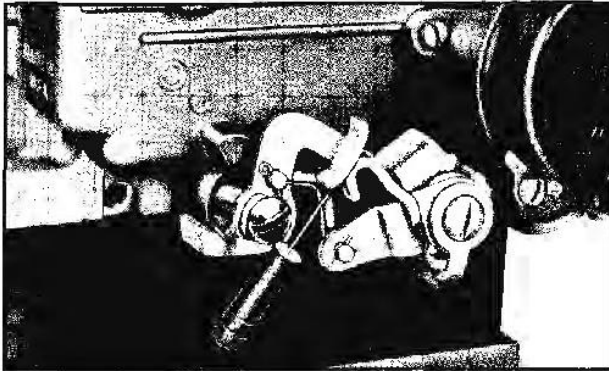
B-100 Checking Secondary Throttle Lever Adjustment
